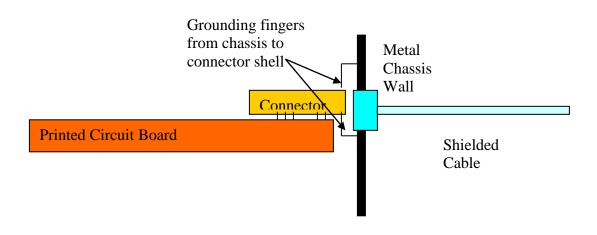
Typical Shielded I/O Connectors mounted directly on PCB
